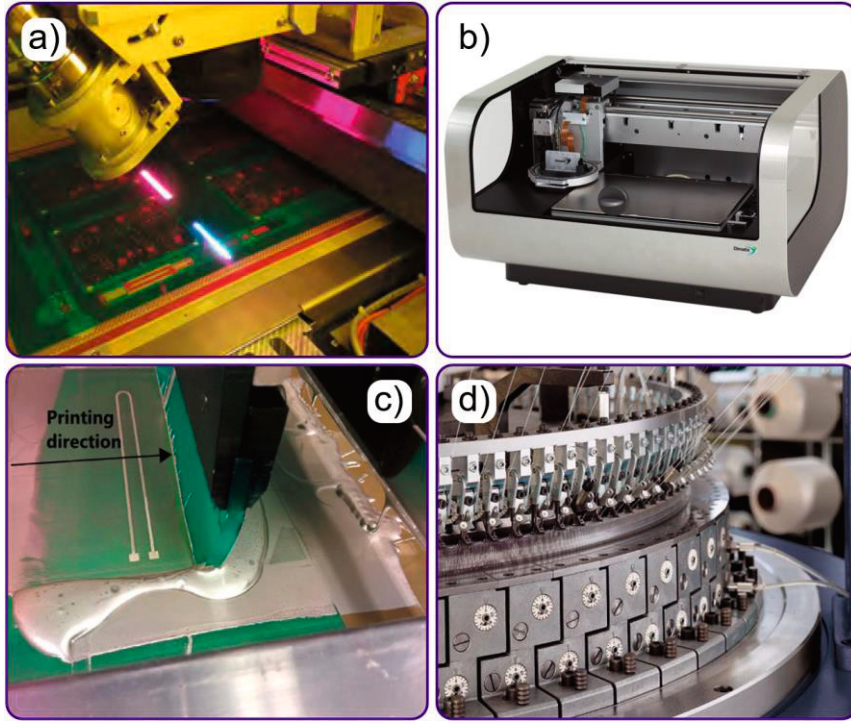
Manufacturing technologies of stretchable interconnections, a) laser direct imaging [167], b) Dimatix DMP-2850 inkjet-printer [168], c) screen-printing [18], and d) circular knitting machine [169].
